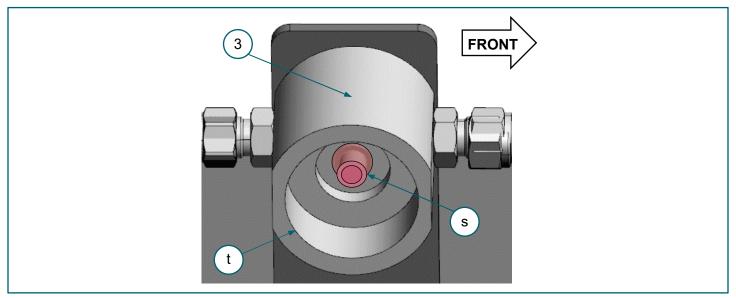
(3) HP fuel filter head, (s) filter element stem, (t) thread location
